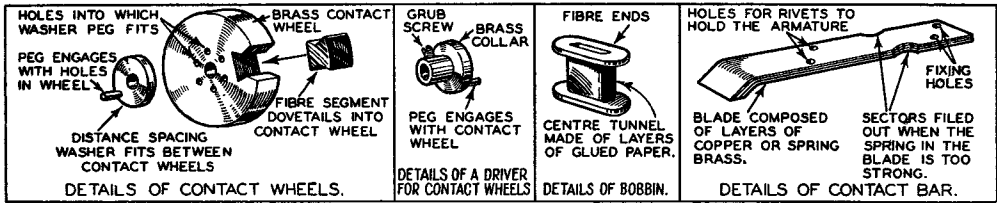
SOME CONSTRUCTIONAL DETAILS.
